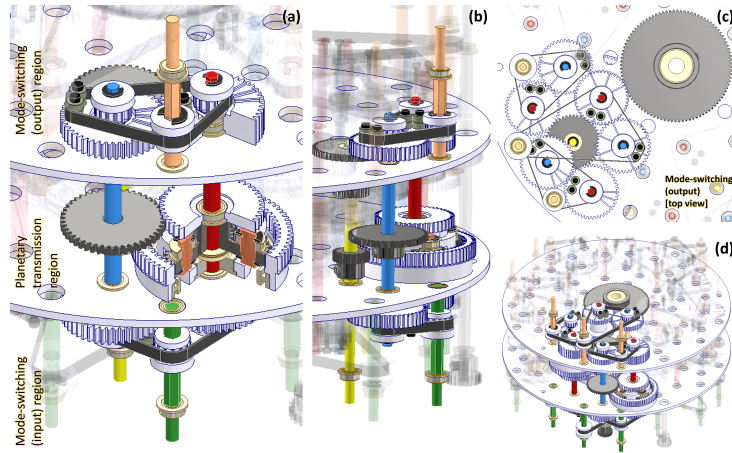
Proposed planetary transmission and mode-switching mechanism of the robotic hand: (a) exploded view, (b) side assembly view, (c) top-view switching configuration, and (d) integrated transmission module.
